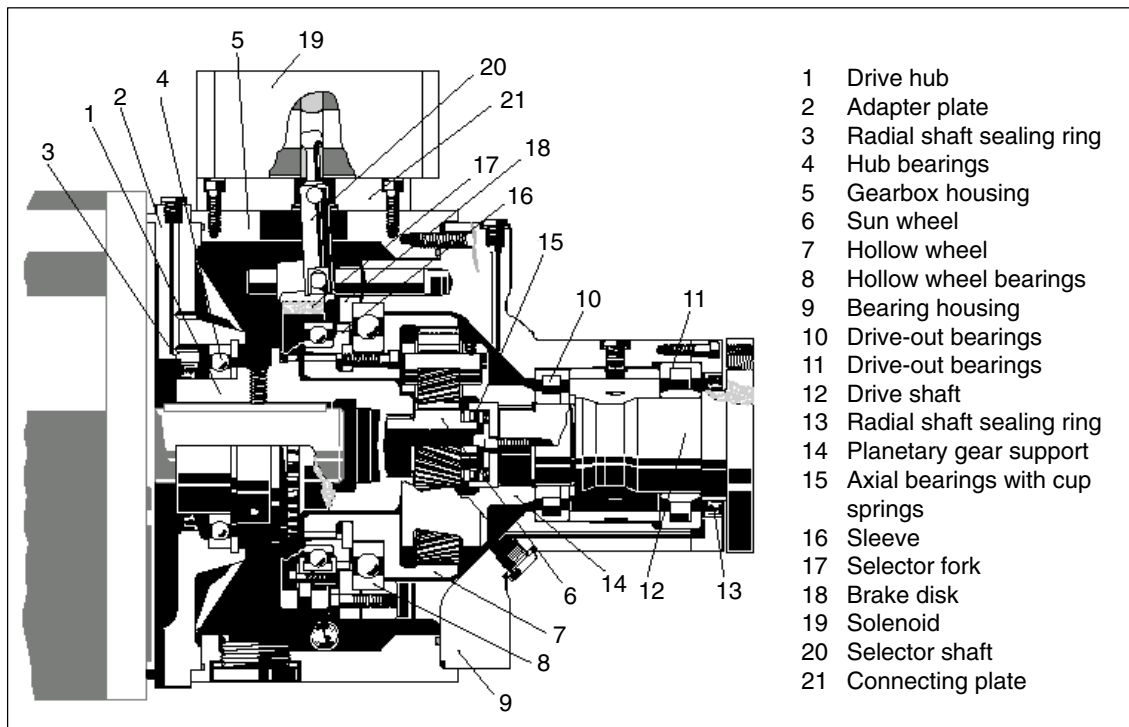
Gearbox design for 1PH7, SH 100 to 160
